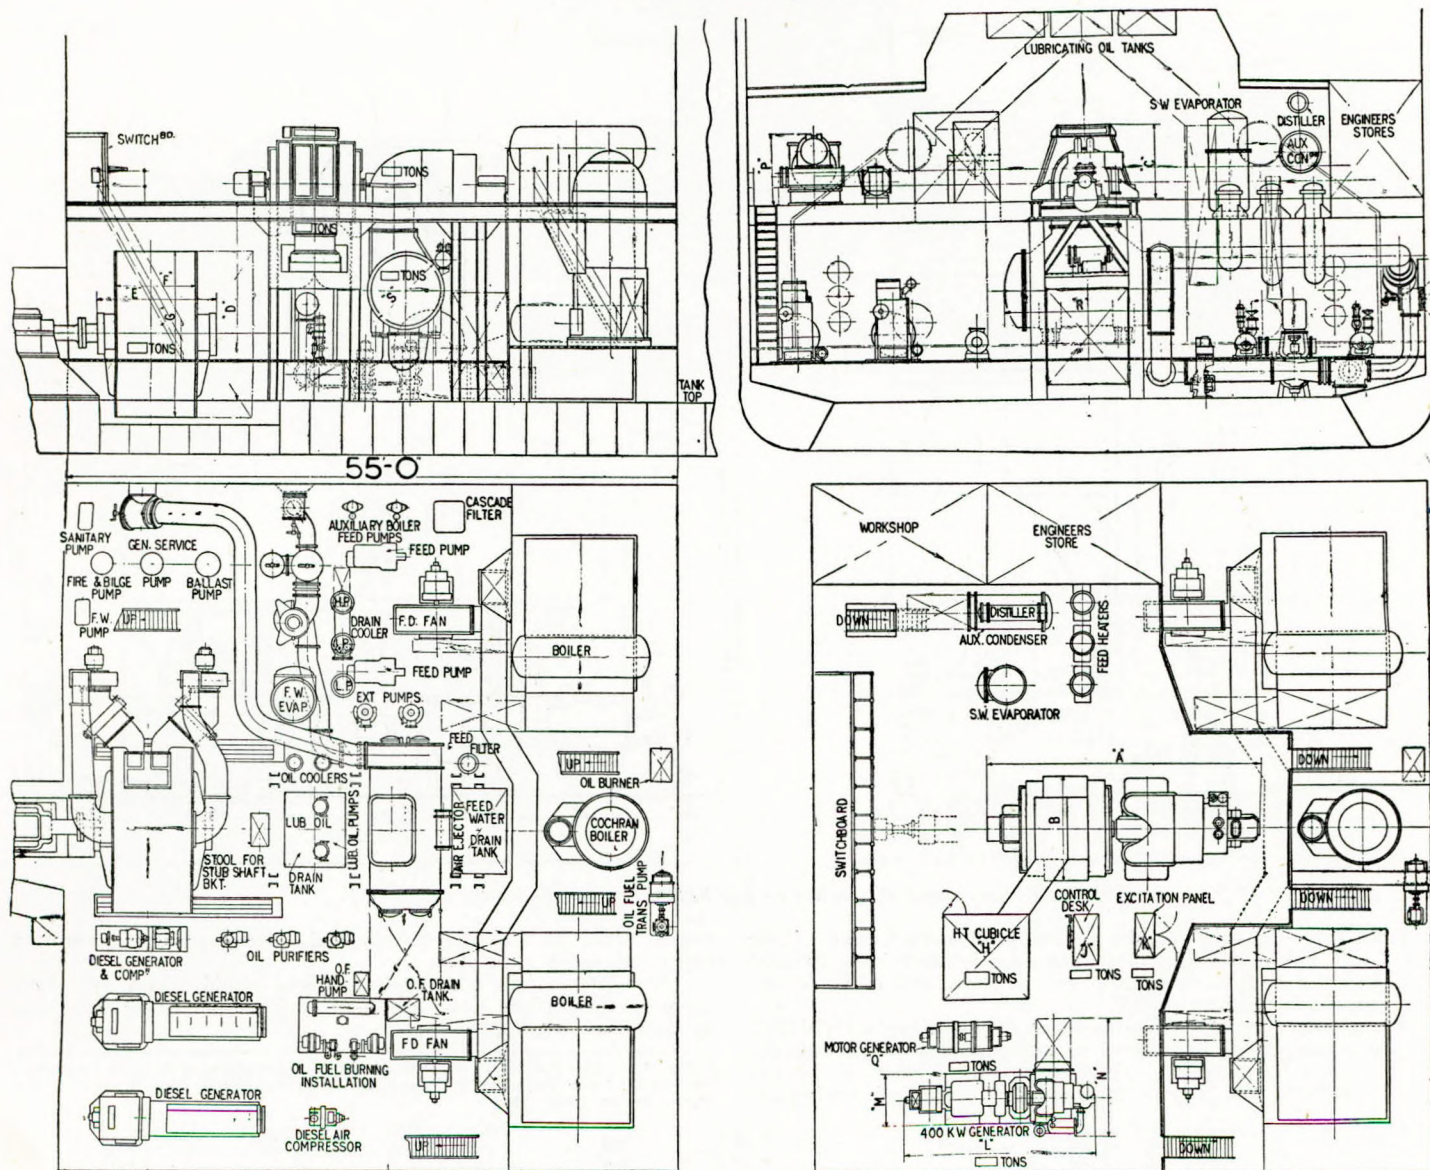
A.—Turbo-electric A.C. machinery 7,500-s.h.p. single screw proposed for general cargo ships.
